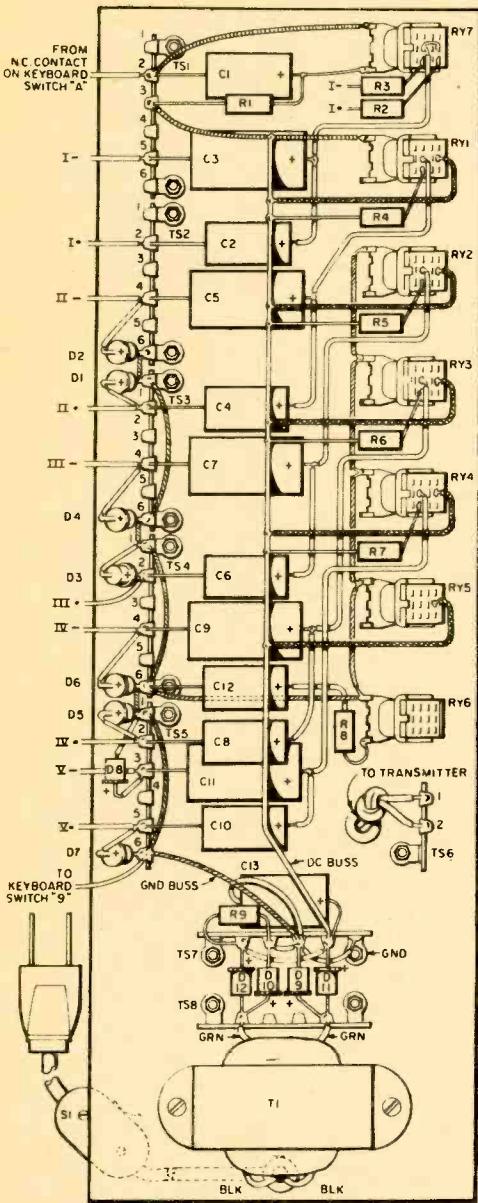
Relay and component chassis. All relays, capacitors, resistors, the terminal strips and power transformer are mounted on a piece of 16½x3¾-inch aluminum. Drill all holes before mounting anything. Drilling holes after the relays are mounted may leave chips in their contacts. After all parts have been installed, make the connections between them as shown. Mark top relay RY7 and number other relays in order from RY1 to RY6. Balance of wiring is covered in Fig. 12.
